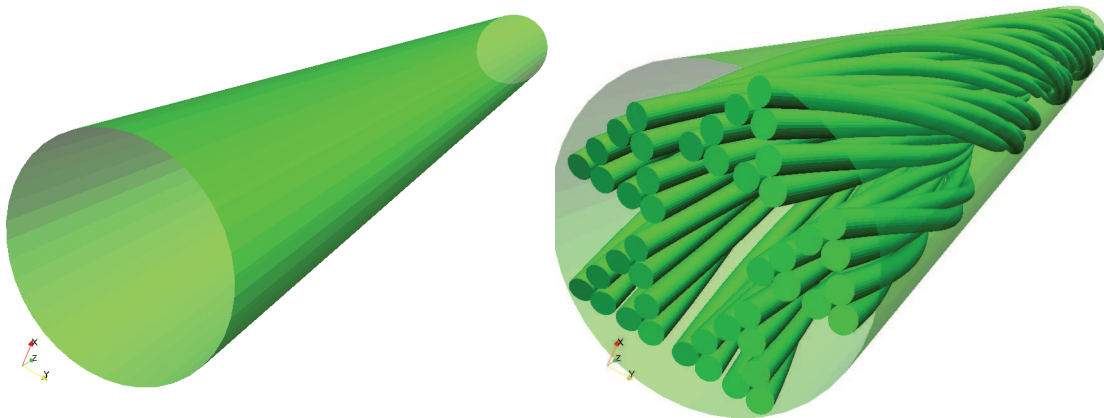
Illustration of cylindrical tool around initial strand assembly (3x3x5).
